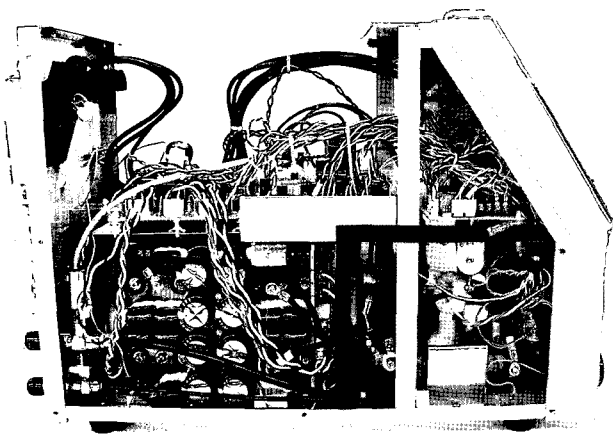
Whole appearance of TIG arc welding power supply using newly-developed PWM DC-DC power converter.
